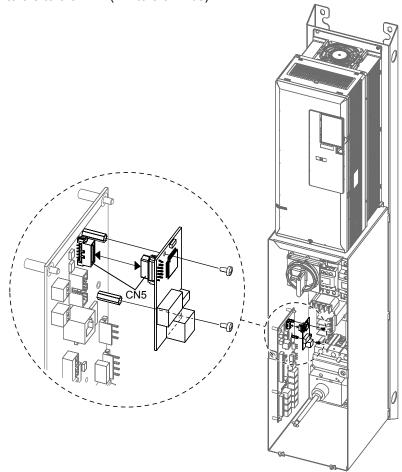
Insert Option into Bypass PCB CN5 Connector Port - Model Z1B1D002
